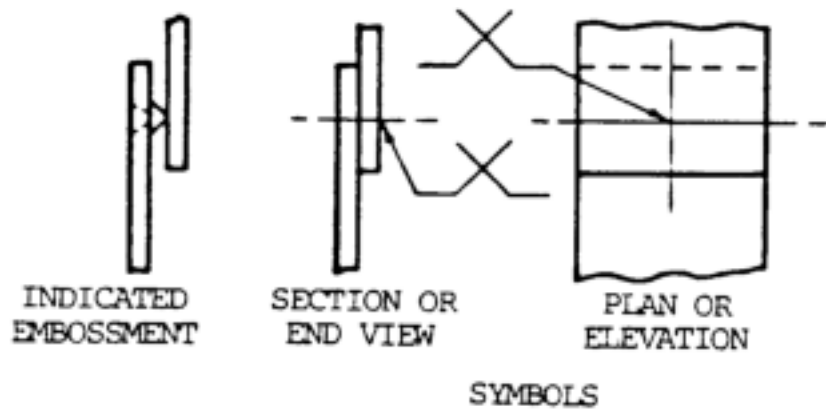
Embossment on other-side member of joint for projection welding.
